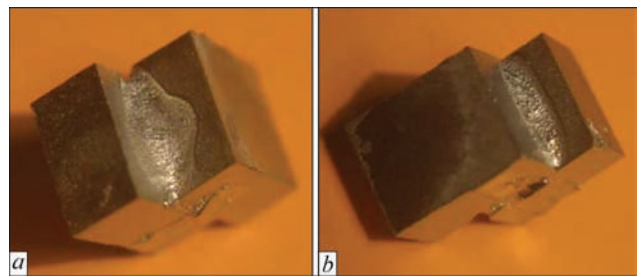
Appearance of overlapped joint, brazed applying brazing filler metal No.1: a — straight fillet; b — reverse fillet
